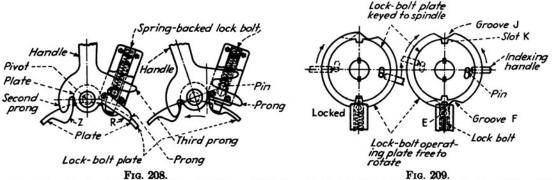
The handle is mounted on the plate and is independent of the lock-bolt plate. As the handle is pulled to the left, the prong pushes against the pin driven into the spring-backed lock bolt, thereby disengaging the bolt. At the same time, the second prong contacts the plate at Z. Both plates then move simultaneously, releasing the lock bolt, which rides on the periphery of the lock-bolt plate, and the bolt falls into the next slot. The handle is then pushed back again, clockwise, contacting the plate at R, upon which a third prong pushes against the pin-seating lock bolt in a locked position.
